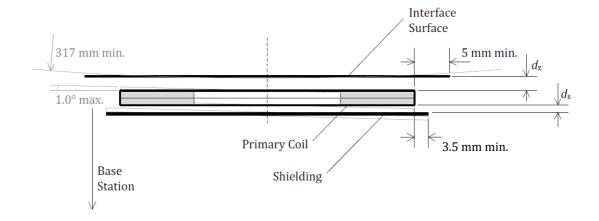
Primary Coil assembly of Power Transmitter design MP-A5
